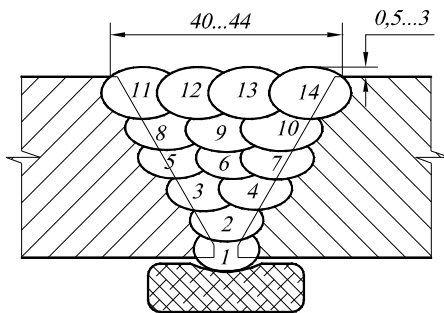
Preparation of joint edge, welding succession and dimensions
